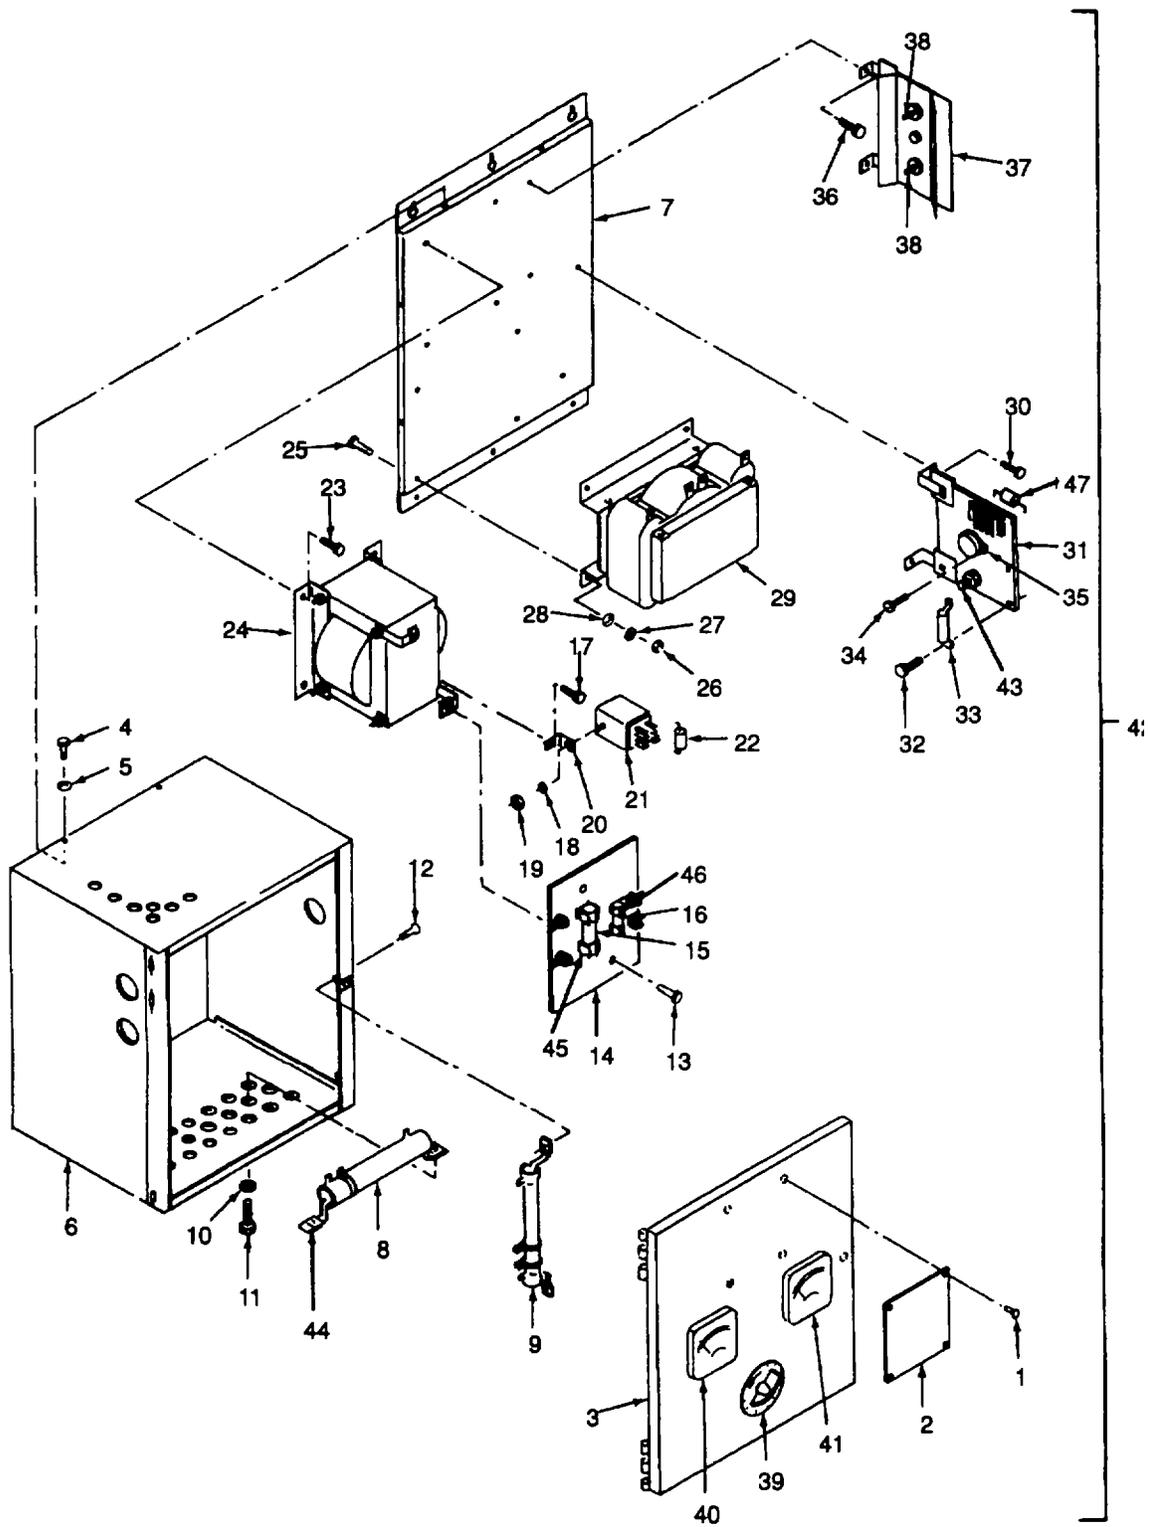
Battery Charger BC1, Exploded View (Sheet 1 of 2)
